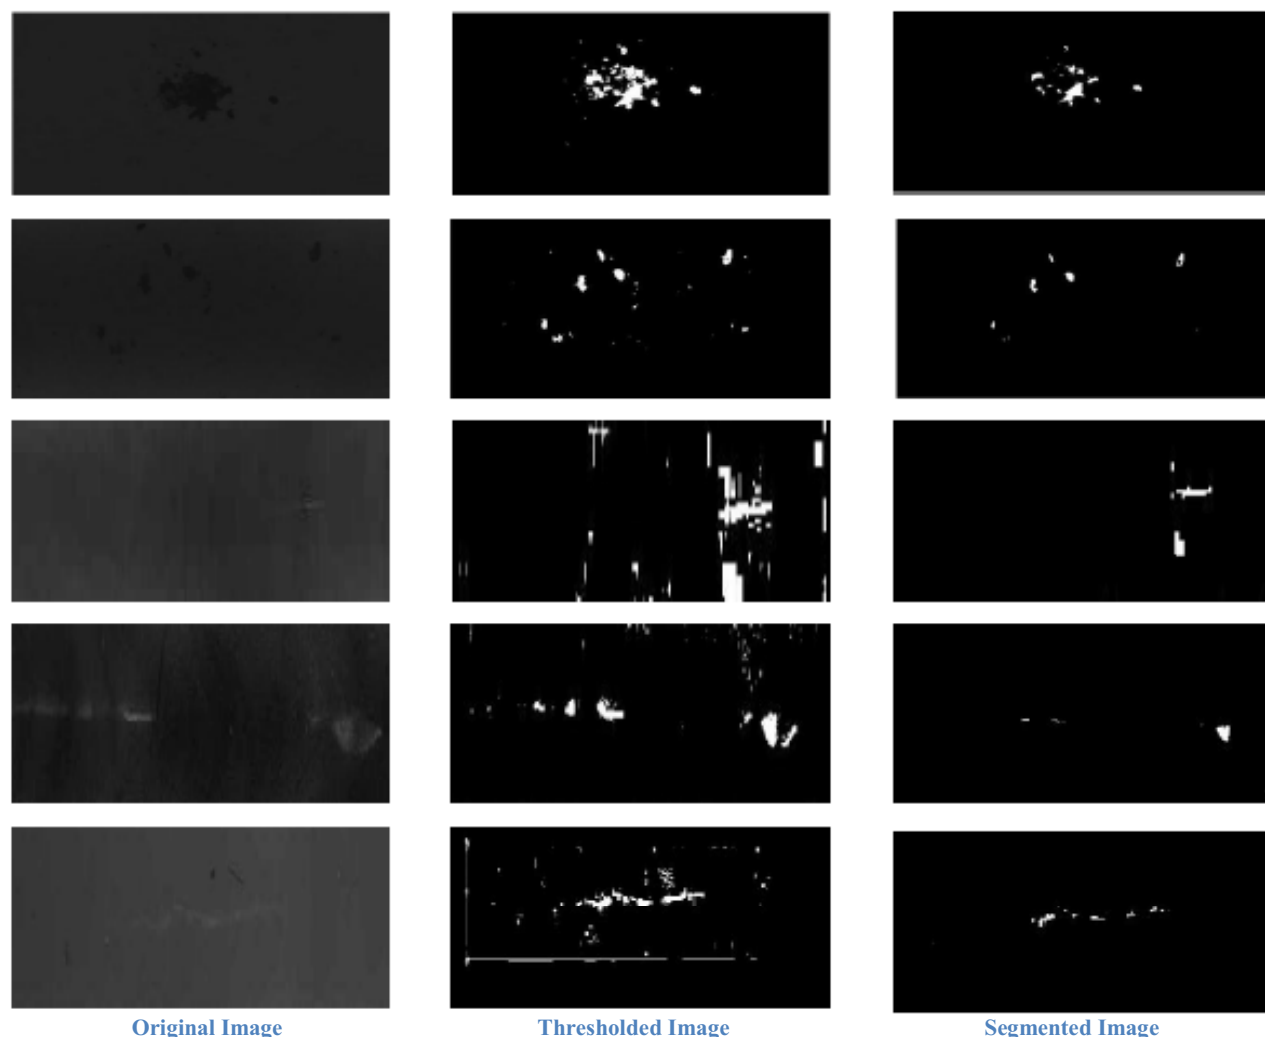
Original, Thresholded and Segmented images of weld seams which contain heavy metal inclusion (1st & 2nd row), Cracks (3rd row), Lack of fusion (4th row) and long Cracking (5th row)
